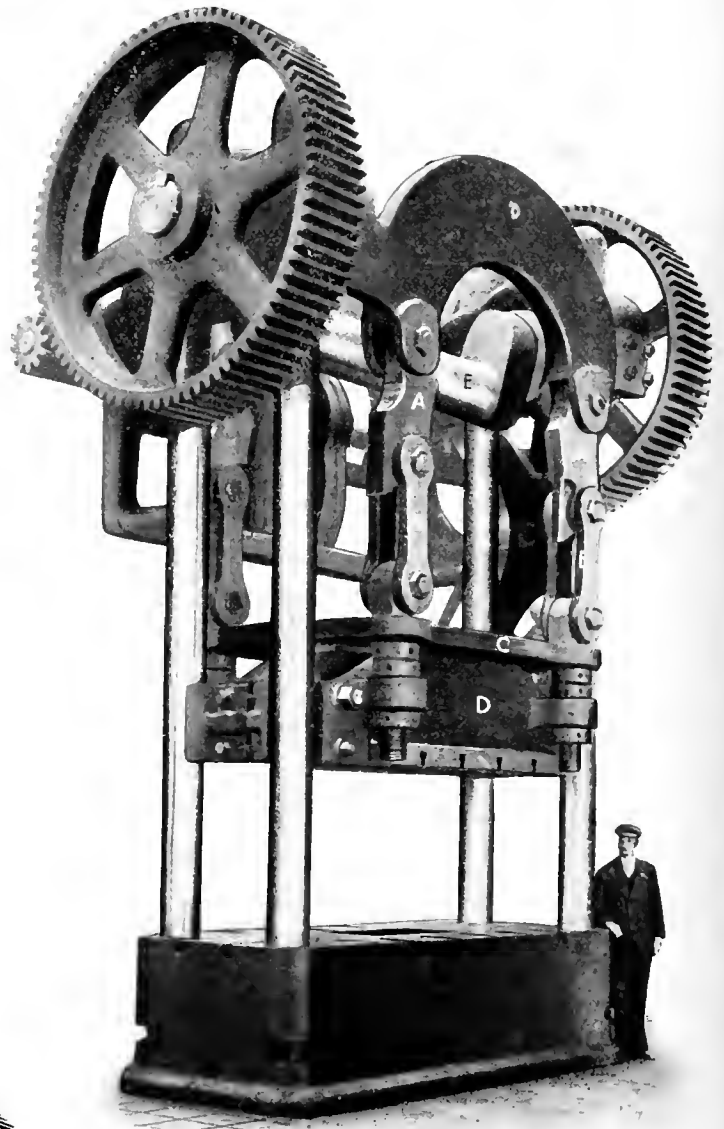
The Press Partially Erected, showing Cam and Toggle Mechanism for Operating Blank Holder
